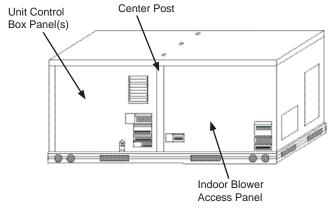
Typical Indoor Fan Motor Access Panel Locations
